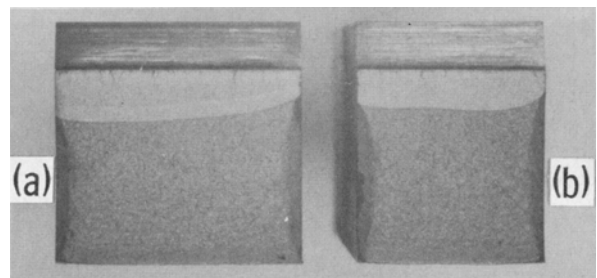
D6AC steel. Fracture faces of precracked Charpy specimens broken in slow-bend. (a) Standard-size, 0.394 in. thick; (b) 0.3 in. thick.
